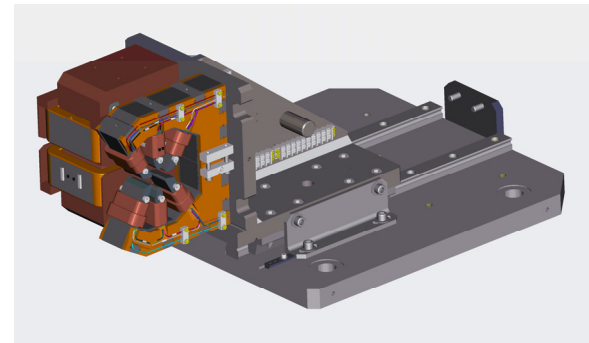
Image of 31010101-505100 center magnet and rail base assembly
